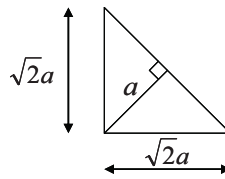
Effective throat thickness of the fillet weld
